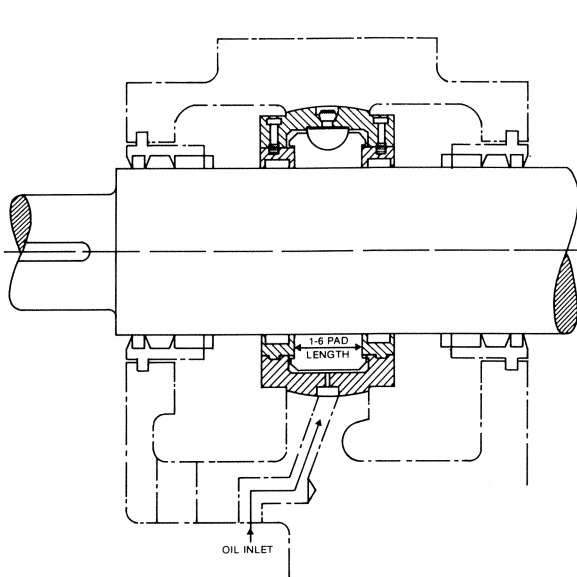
New Tilt Pad Bearing Conversion for Existing Rotor Shaft.
